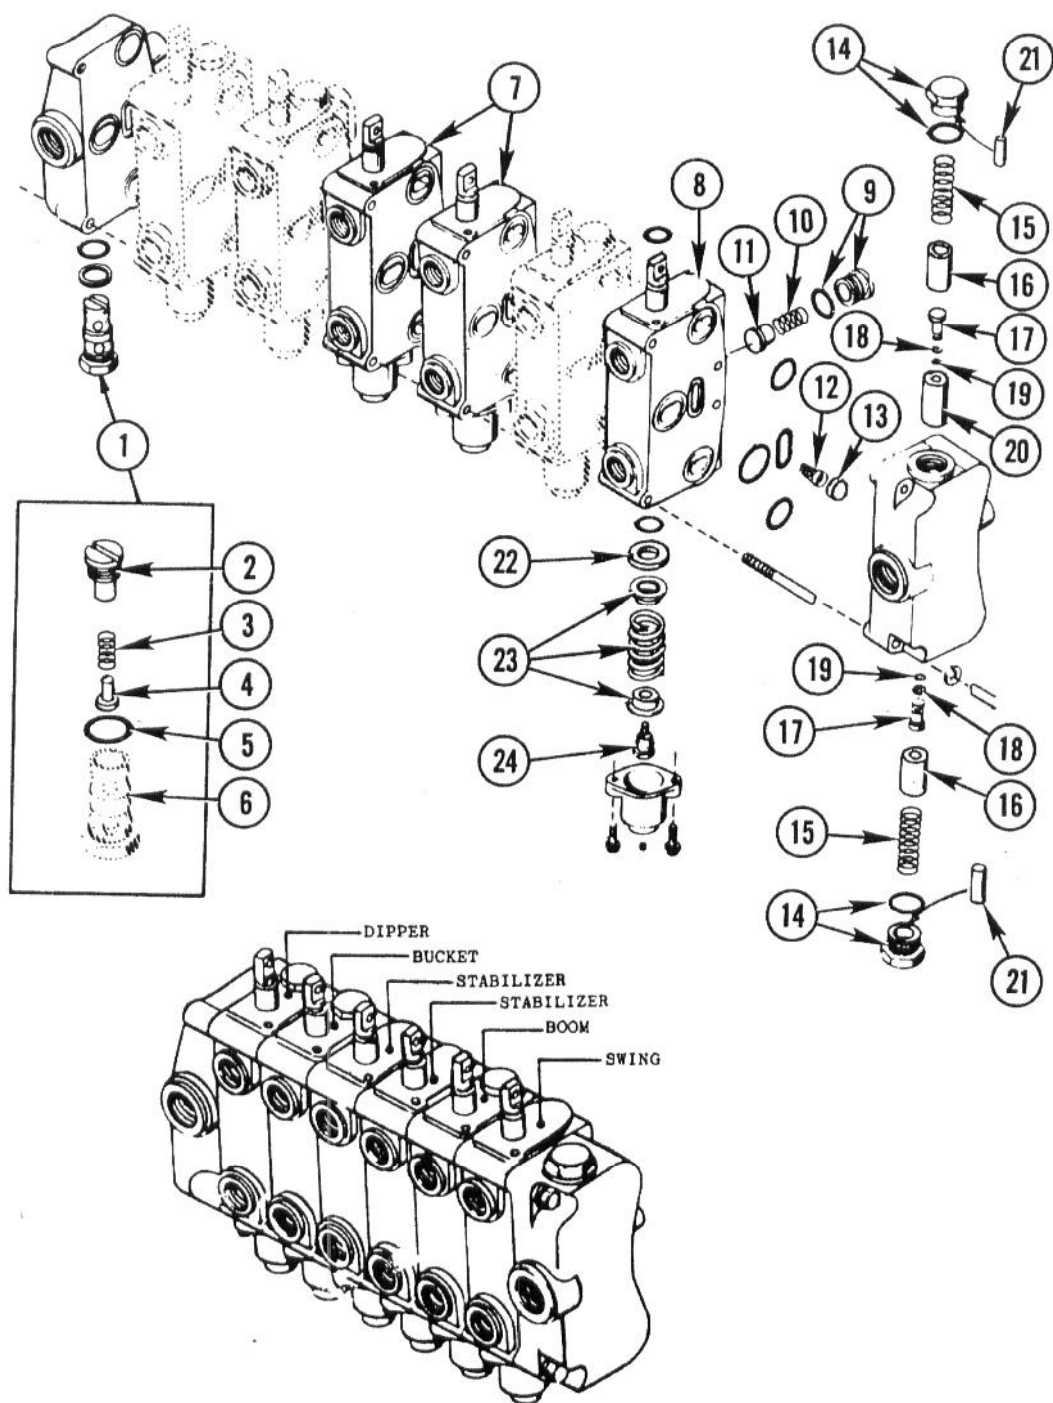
End Plates, Swing and Stabilizers Sections of Control Valve
